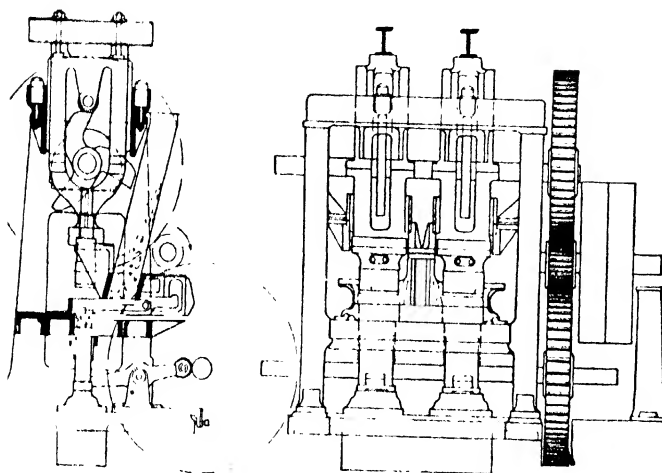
Dorsten Brick Press for two stamps. Cross section and front elevation
